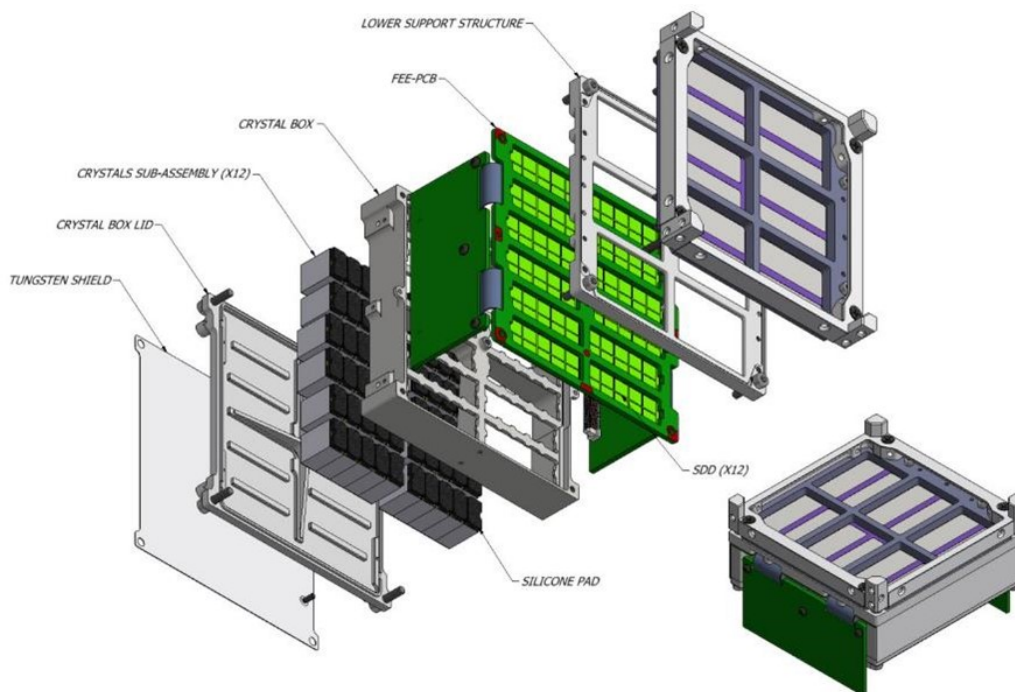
Exploded representation of the HERMES Pathfinder detector box
